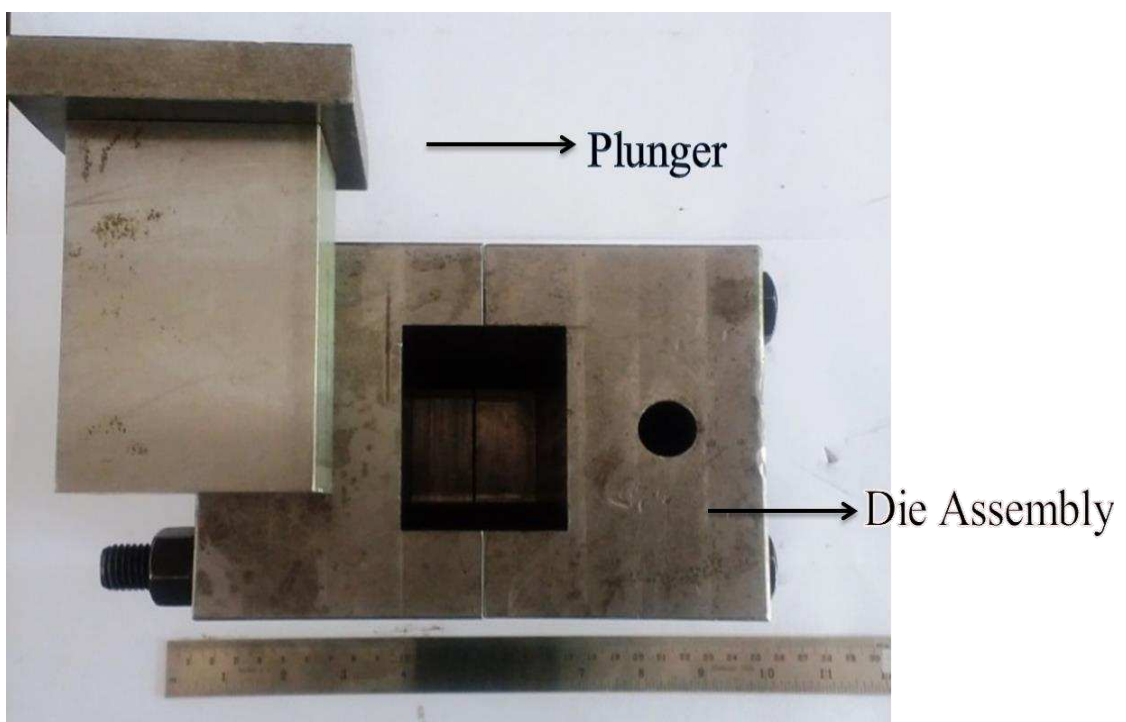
Photograph of Squeeze casting dies with plunger.
